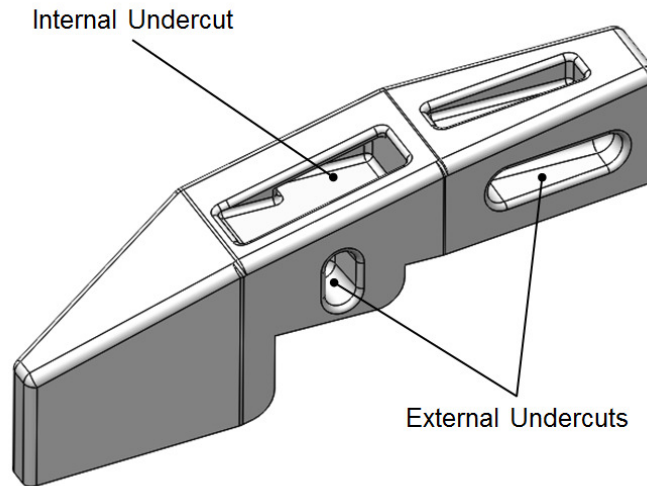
Simple example of a part that has internal and external undercuts. The external undercuts can be included into the part using a slide core while the internal undercut would require a secondary machining operation to get a similar geometry. Internal undercuts should be avoided.
